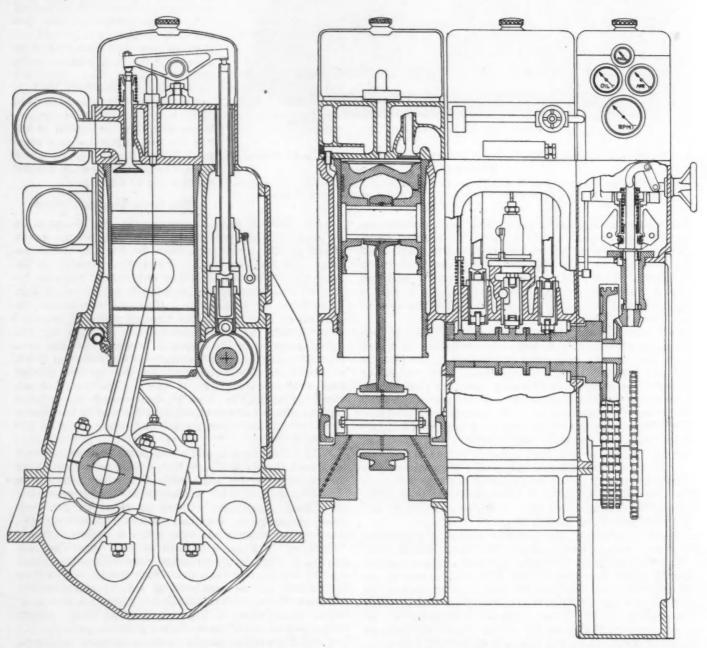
Transverse and Partial Longitudinal Cross-Section of DelaVergne 9 x 11-In, High-Speed Diesel Engine Air Enters at the Dual Inlet Valves from the Lower Manifold through a Short Passage, Partly Vertical, Having Directing Fins as Indicated in Fig. 5
